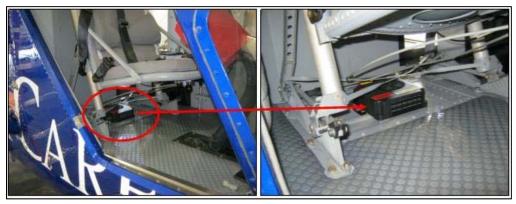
AV/Cabin Heater THP3094-500. Location varies due to seating configuration. Suggest locating as shown, in crew cabin below right front seat with four supplied Click Bond stud mounts CB4000E3CR16 1-inch 10-32 or equivalent CB3000 or 4000 series studs round or trimmed base (-750). Surface preparation: Lightly abrade glossy surfaces with scotch bright or equivalent, to improve the adhesive bond. Just prior to adhesive application, clean surfaces with CB911 solvent wipe, then to prevent redisposition of contaminants dry with a clean dry cloth before solvent evaporates. Do Not use shop towel, rags or paper wipes contaminated with oil, soap, or reclaimed solvents.
